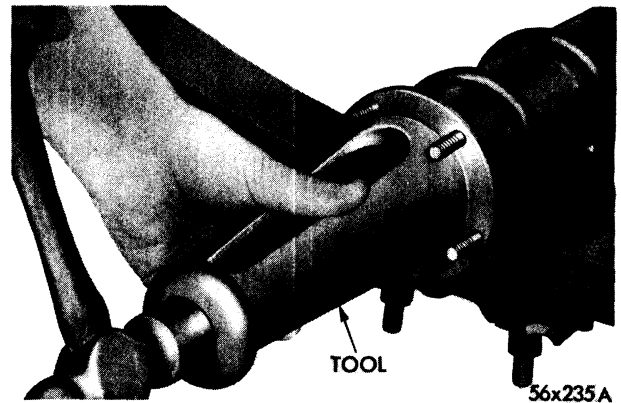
Installing Axle Drive Shaft Bearing Cup with Tool C-413
